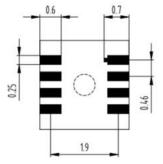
Recommend WHT 30 PCB design size (unit: mm) Top view
